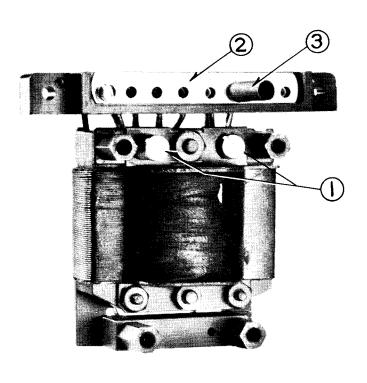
"E" Type Electromagnet. 1-Magnet Plugs. 2-Tap Block. 3-Tap Screw.
